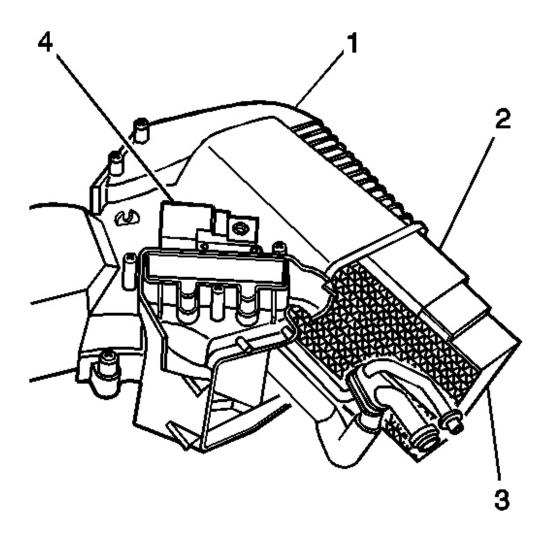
Removing/Installing Evaporator Core - Auxiliary Courtesy of GENERAL MOTORS CORP.
